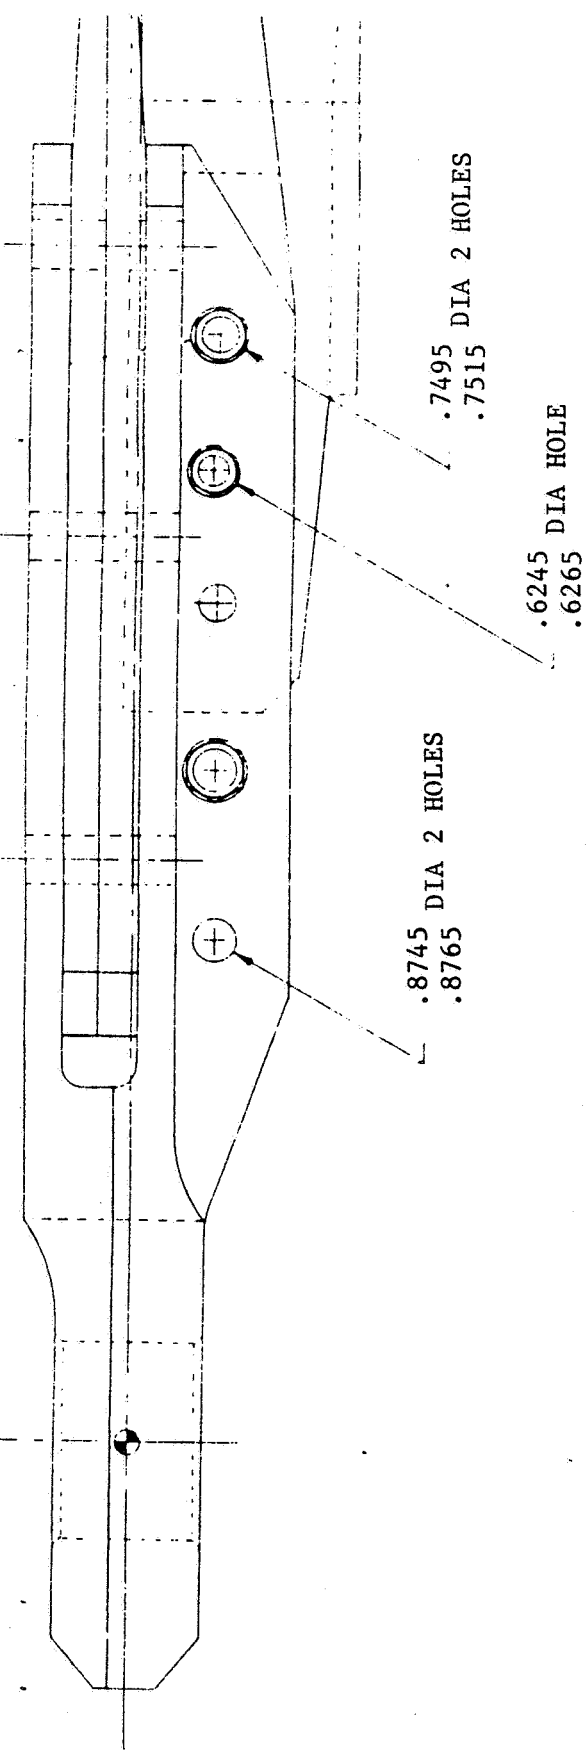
TECHNOLOGY DEMONSTRATION SPECIMEN ASSEMBLY
